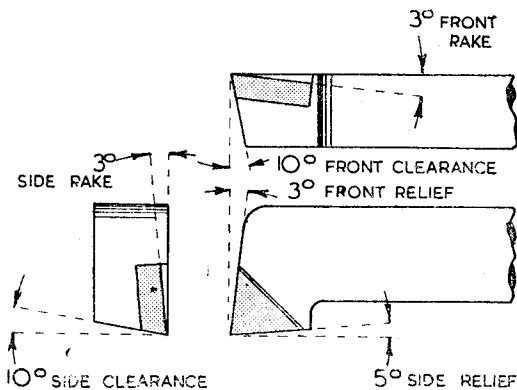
A tungsten carbide-tipped tool suitable for machining bronze
